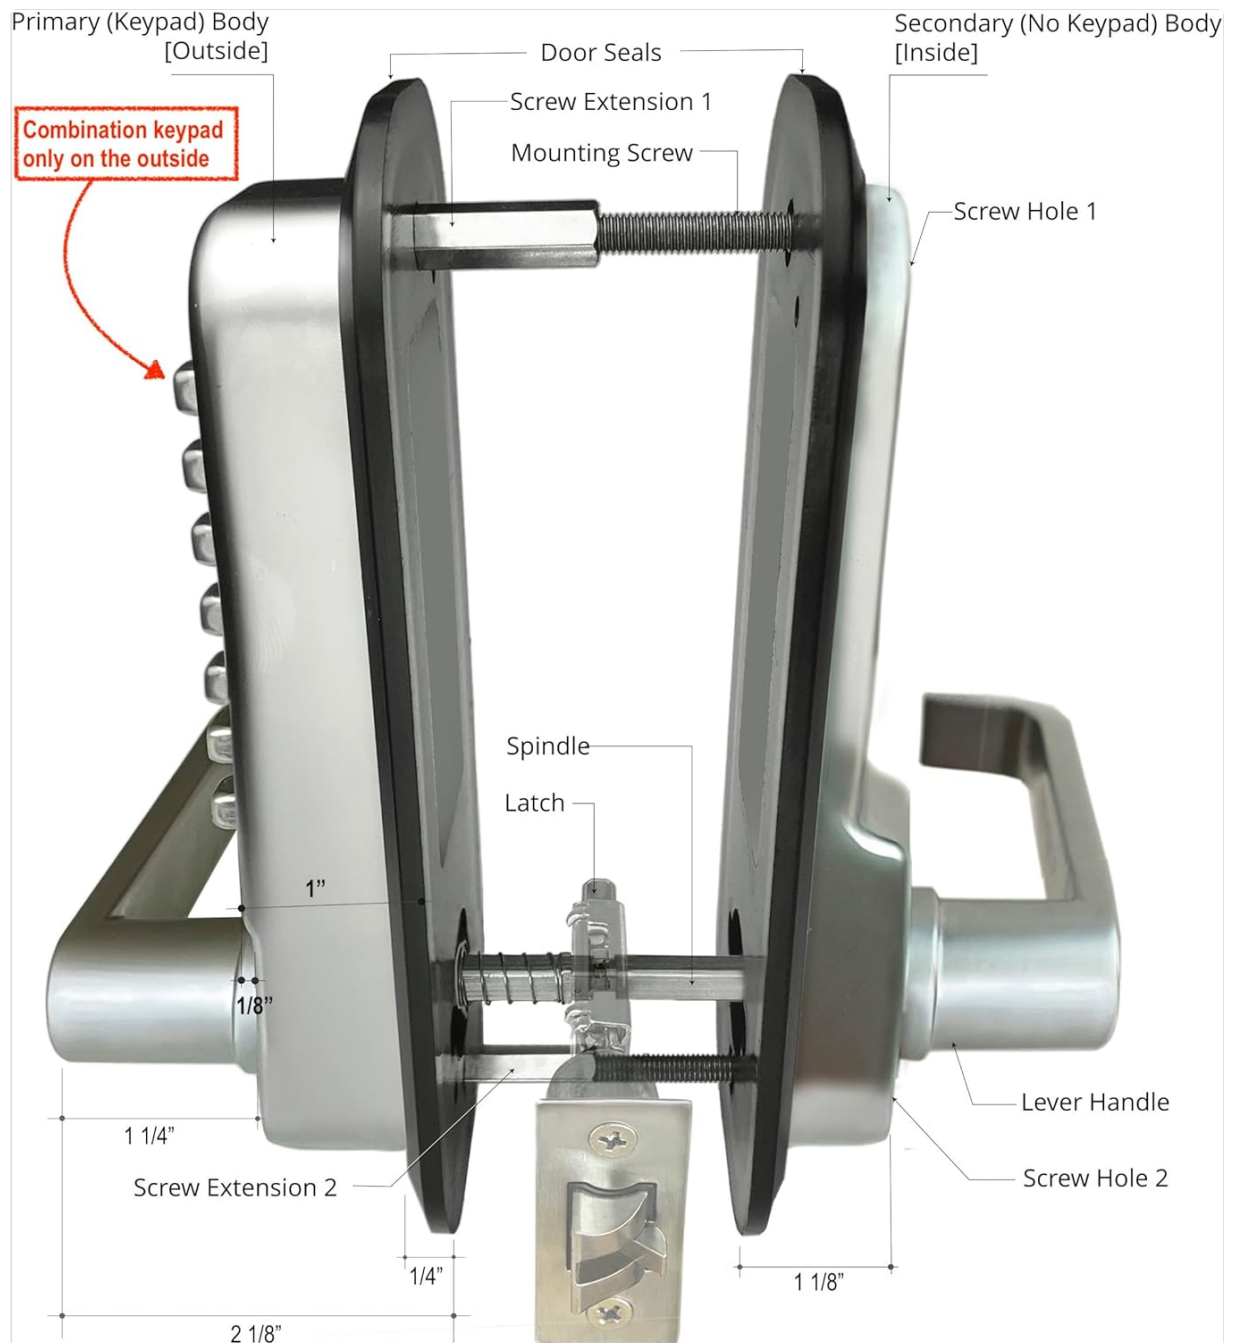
Detailed view of the lock's internal structure, including the primary keypad body, secondary body, door seals, spindle, latch, and screw extensions.
